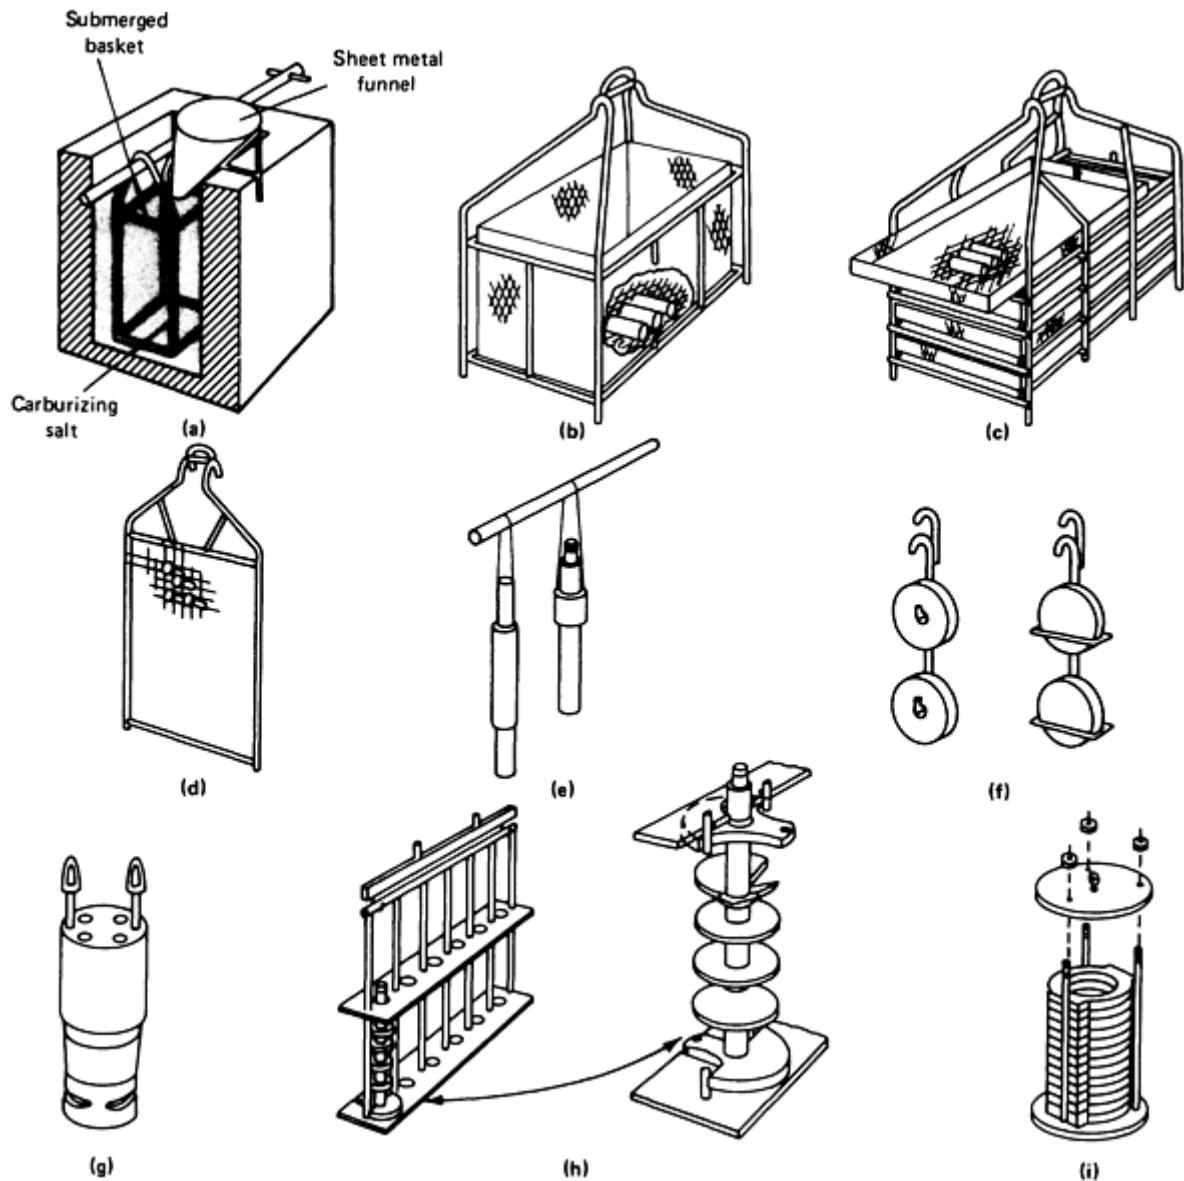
Work-holding fixtures and wiring techniques used in liquid carburizing. (a) Typical holding basket for small parts, equipped with a funnel for loading parts into the basket without splashing. The funnel, which is made of sheet metal, also ensures that parts are coated with salt before they are nested together. Basket may be made of carbon or alloy steel rod and steel wire mesh. Work must be free from oil, or the parts will stick together. Parts must be dry. (b) Inconel basket of simple design. Upper loop of handle is for lifting; lower loop accommodates a rod that supports the basket over the furnace. (c) Simple basket with trays, intended for small parts. Trays provide maximum loading space without adversely affecting circulation. Entire fixture is made of Inconel. (d) Method of running flat parts. (e) Method of supporting small parts. Black annealed steel wire is used for parts weighing less than 4.5 kg (10 lb); annealed stainless steel wire is used for heavier parts. (f) Hooks, made of nickel alloy rod, for holding circular parts. (g) Method for holding large parts in which tapped handling holes are available or can be provided. Nickel alloys are used for such fixtures because of the need for high-temperature strength. Resistance to oxidation is not a factor, because liquid carburizing salts are reducing. (h) Rack for holding six small crankshafts; exploded view shows a crankshaft positioned in the rack. (i) Special rack for carburizing the outer surfaces of bearing races. Holding plates are made of mild steel; rods, of Inconel.
